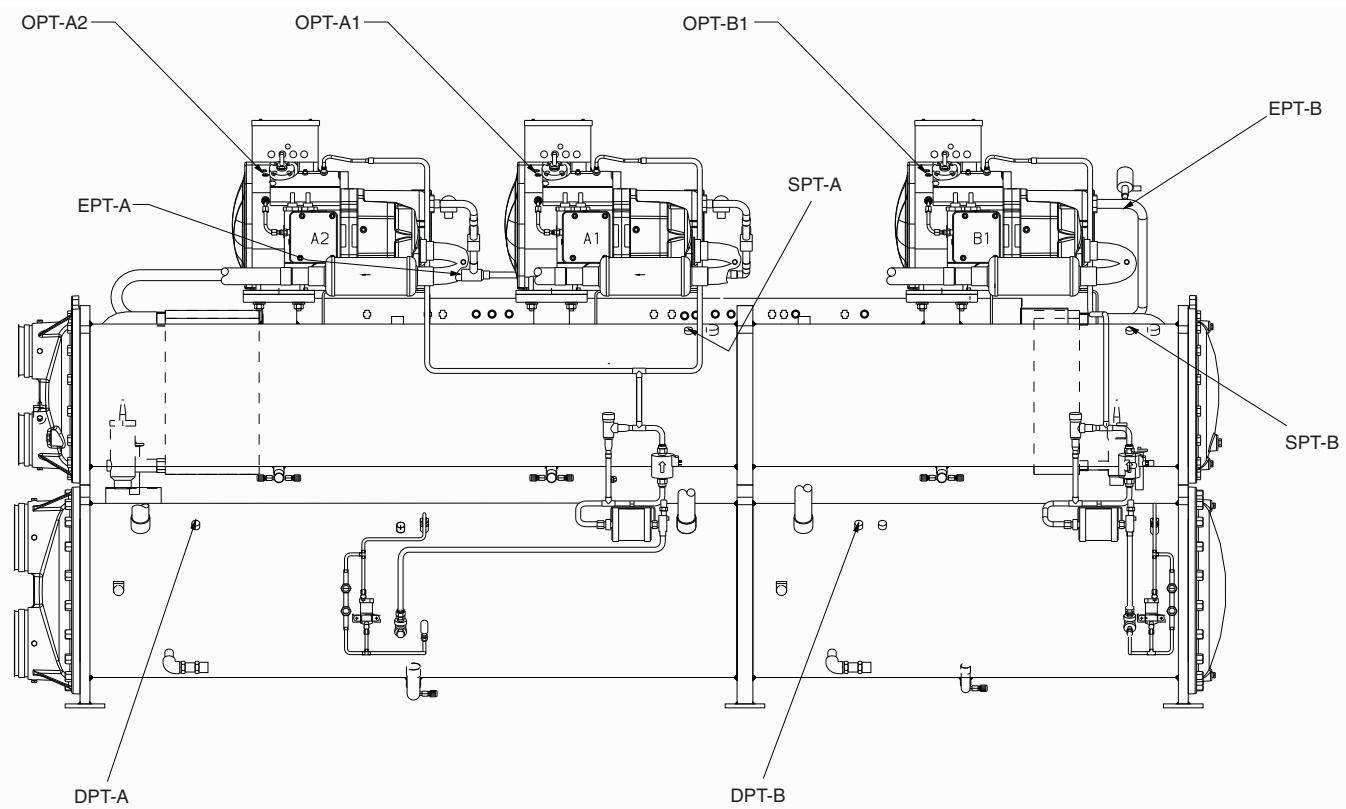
B — 30HX Pressure Transducer Locations (3-Compressor Unit)
